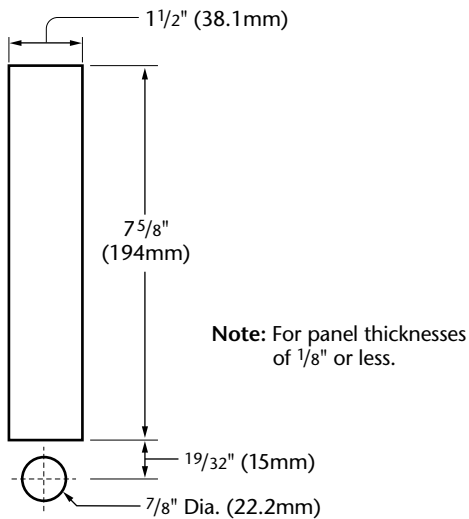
Panel Cutout Dimensions for Series 150 Single Tube Flowmeter with Optional Aluminum Bezel (FM 4710)
